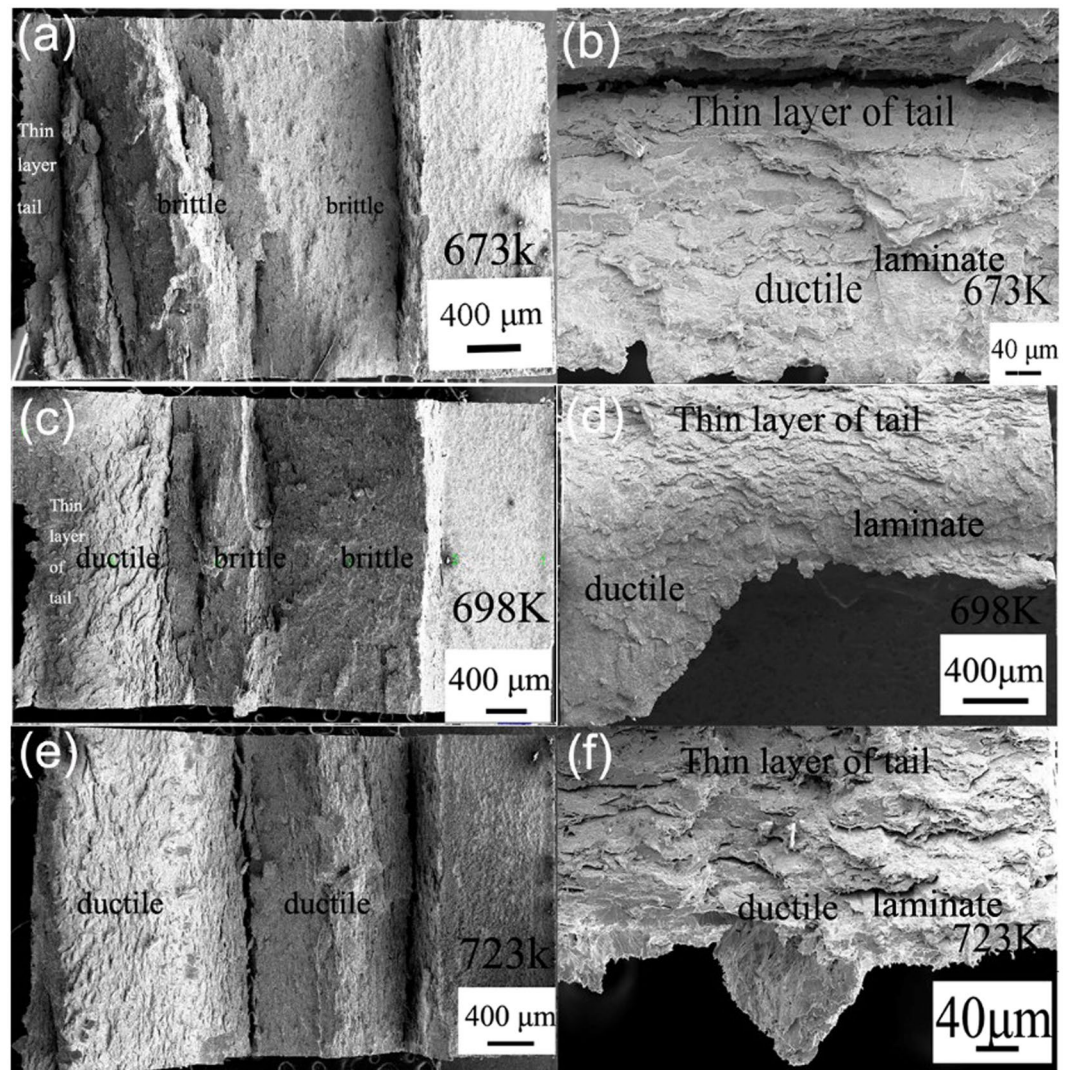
Fracture surfaces of the Charpy impact for the $\varphi 1.5$ mm ZrO_2 ball SMATed WL10; (a,b) 673 K, (c,d) 698 K, and (e,f) 723 K.
